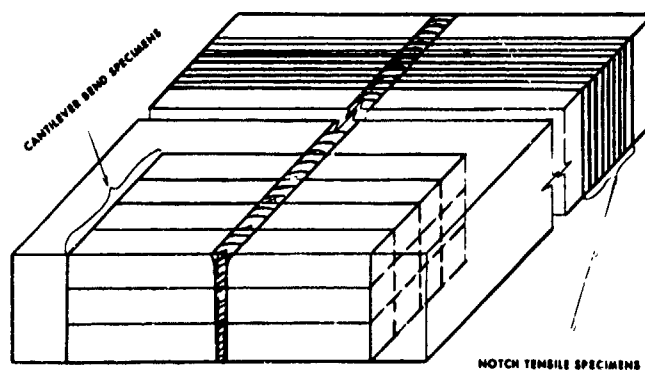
Specimen layout from two inch electron beam weldment
